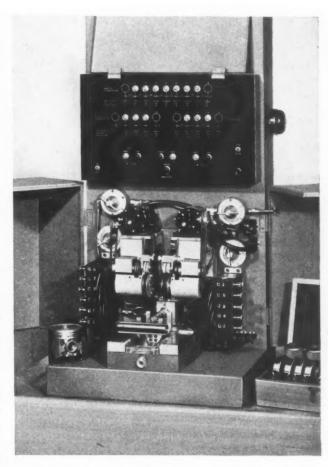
Close-up View of Machine Illustrated in Fig. 6, Showing Combination Air-electric Gaging Heads that Control Motor-driven Mechanisms for Automatically Stamping Classification Number and Letters on the Piston
